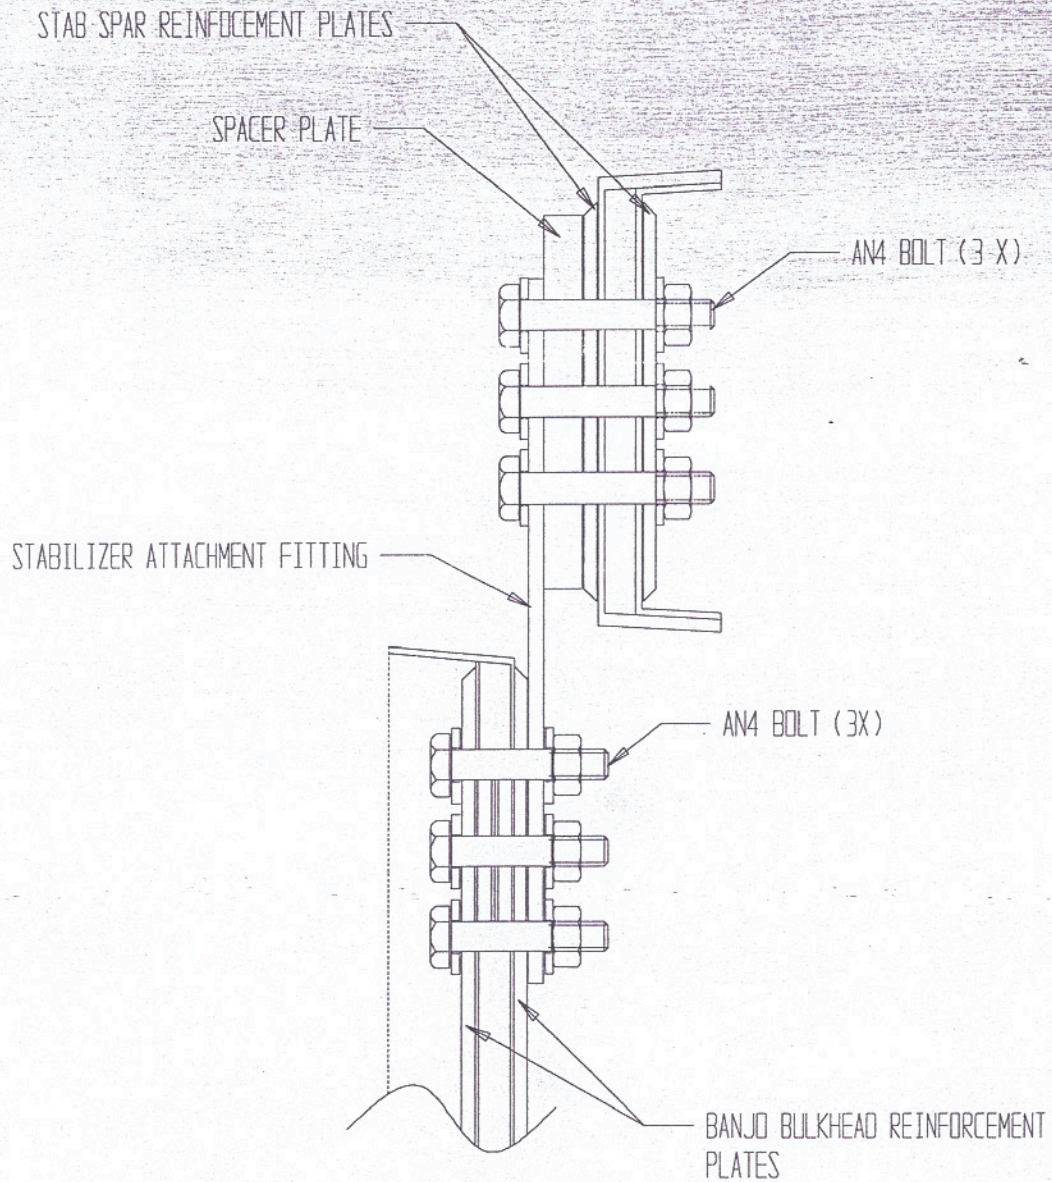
Cross section of stabilizer spar and lower banjo bulkhead showing installed components
